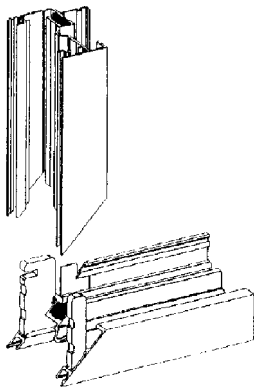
OUTER FRAME CORNER ASSEMBLY
